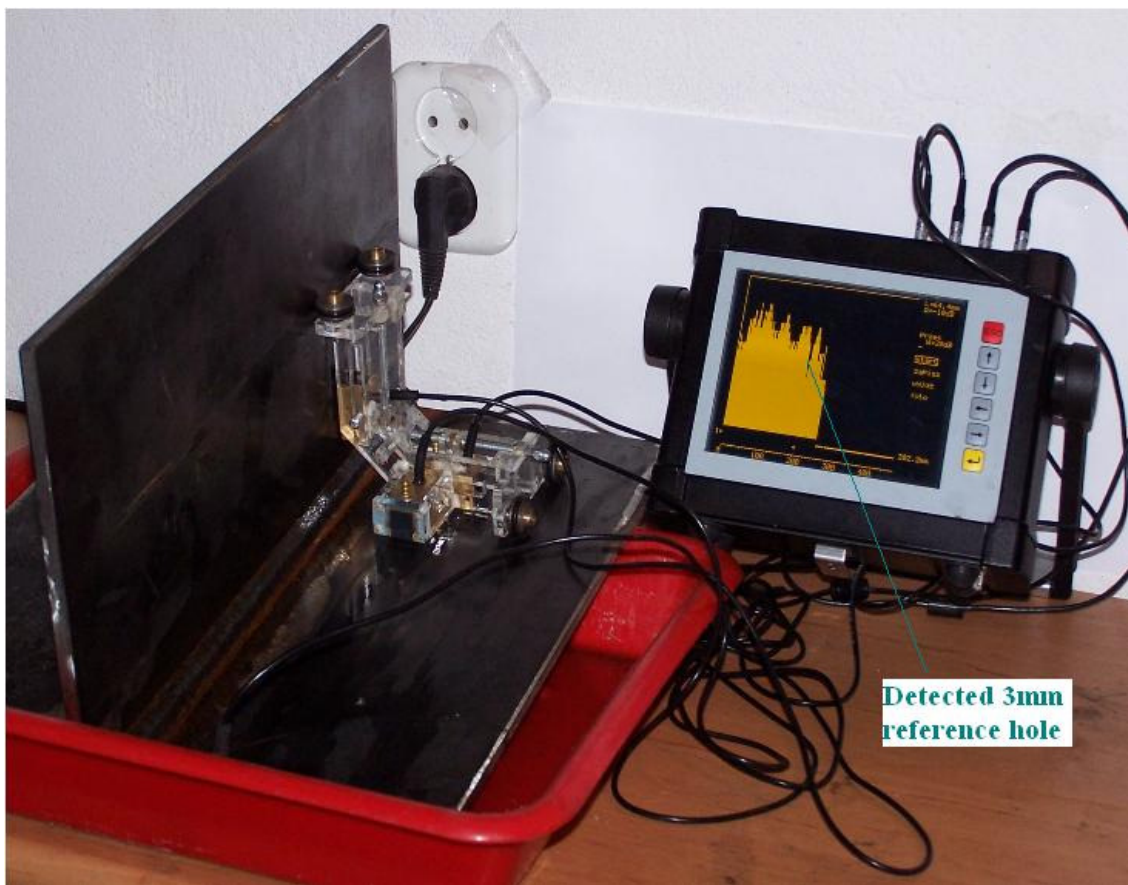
Angle weld tested by "Riksza", whole weld testing result is shown on flaw
